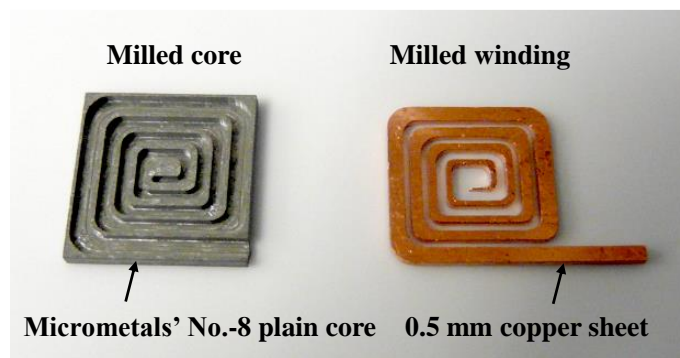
Prototypes of routed core (left) and routed copper winding (right).
